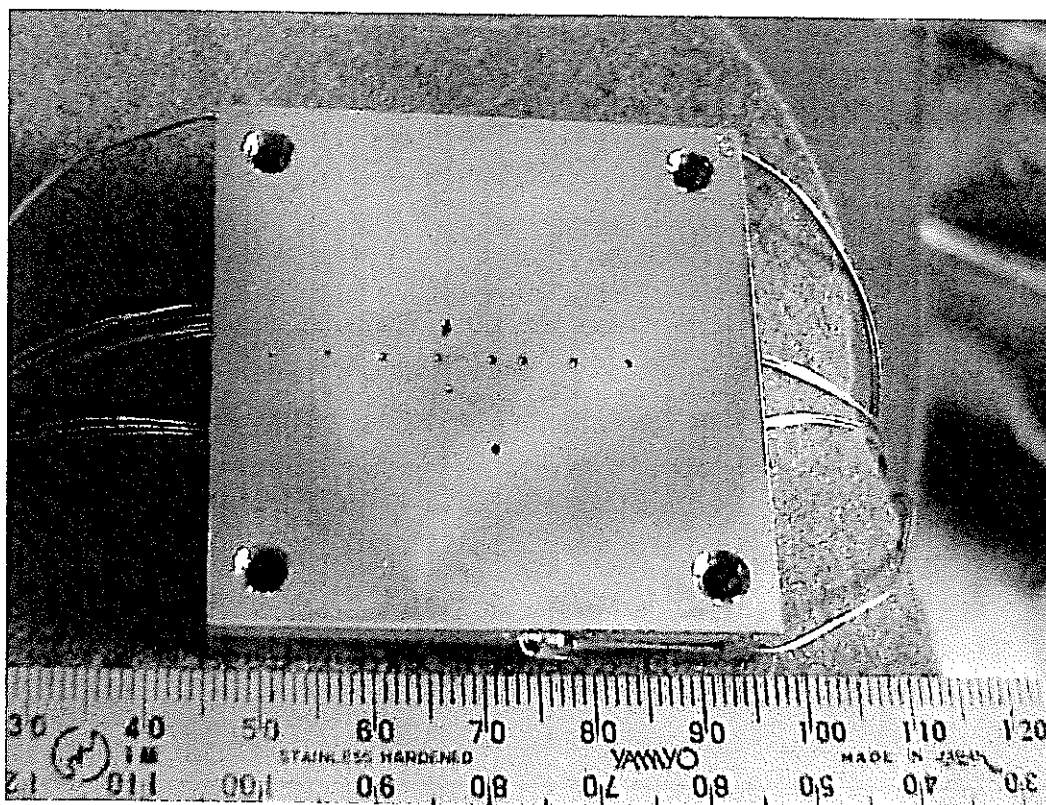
Photograph of a constraint plate specimen with thermocouples
